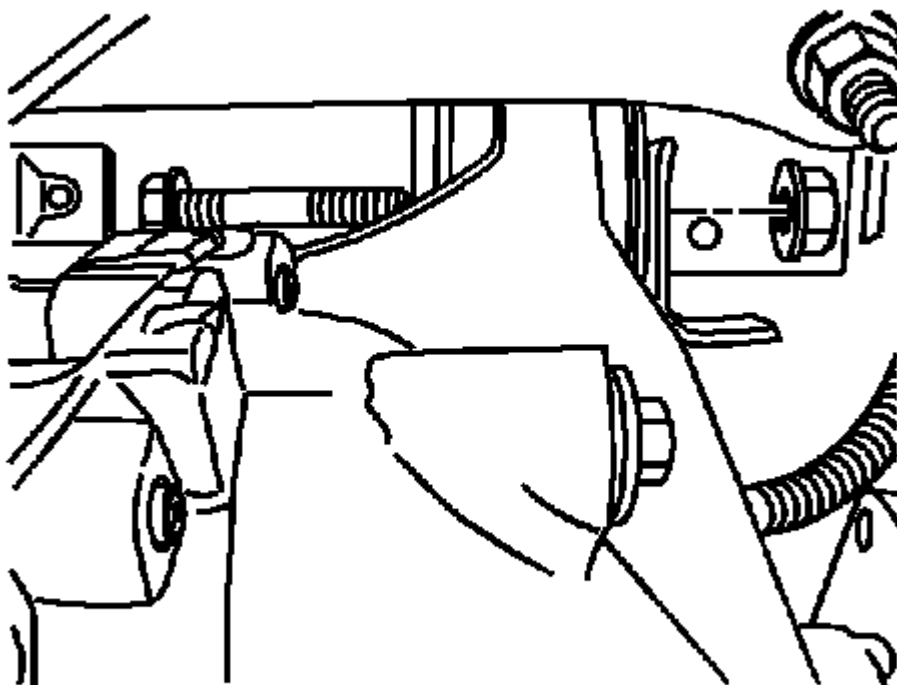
View Of Crossbar Bolts & Bar (2WD)
